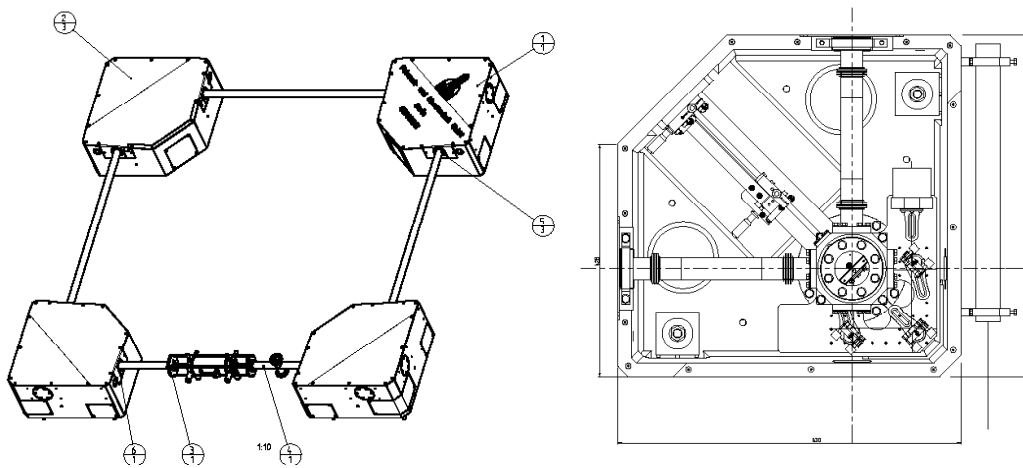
Design of the ring laser component of the GEOsensor. The overall view (left) and corner box(right)
